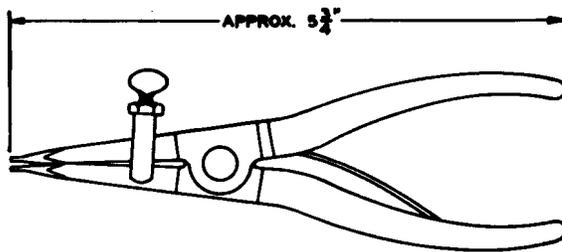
R-2975 Adjustable Snap-Ring Pliers
